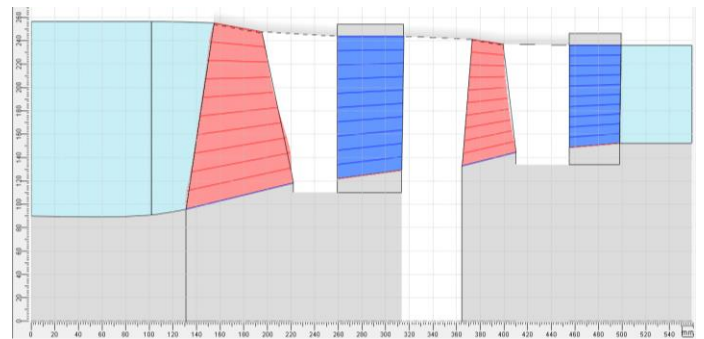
2-STAGE TRANSONIC AXIAL COMPRESSOR, MERIDIONAL VIEW
